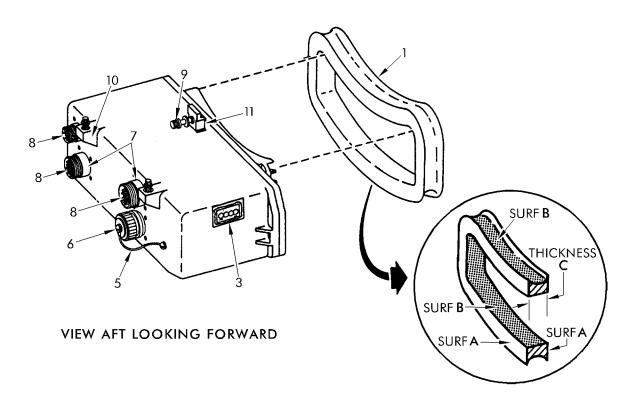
Digital Electronic Control (DEC) and Scroll Seal; Inspection
